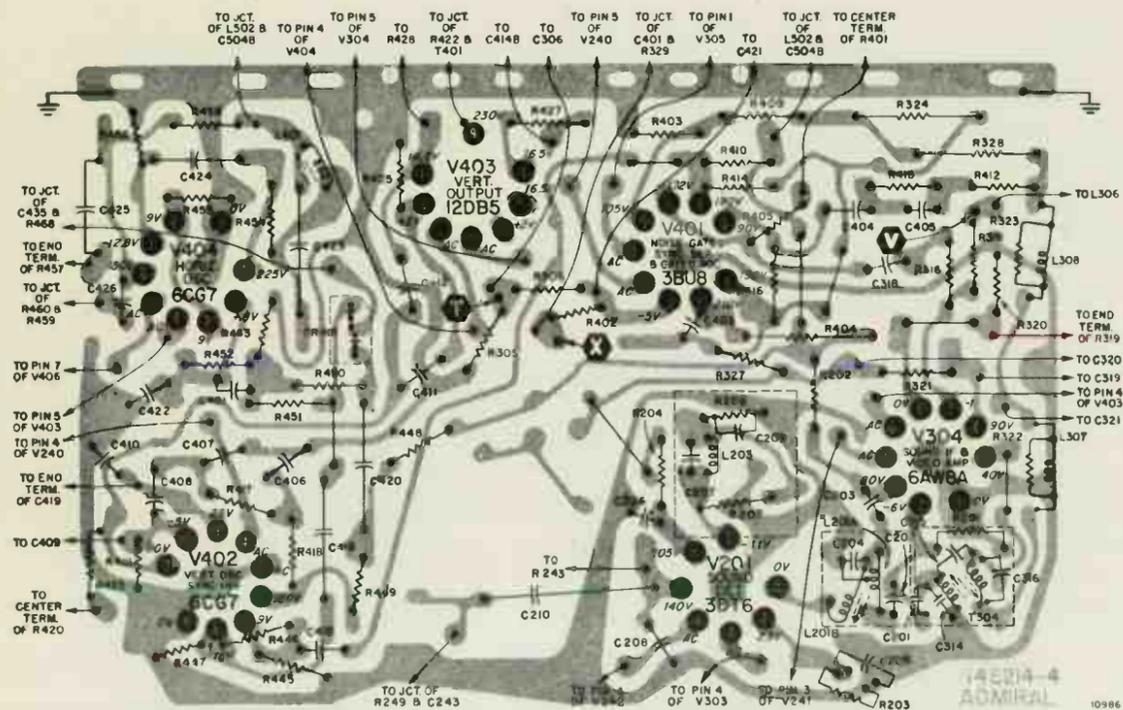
View of Printed Wiring Side of Main Board A5780-4 Used in 16U1C, 16A1C, 16W1C and 16AW1C Chassis. Gray area represents printed wiring; black symbols and lines represent components and connections on opposite side.
